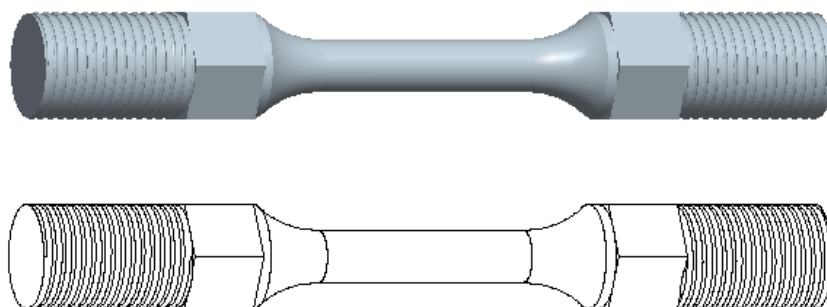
Modified sample geometry for axial- torsional loading.
